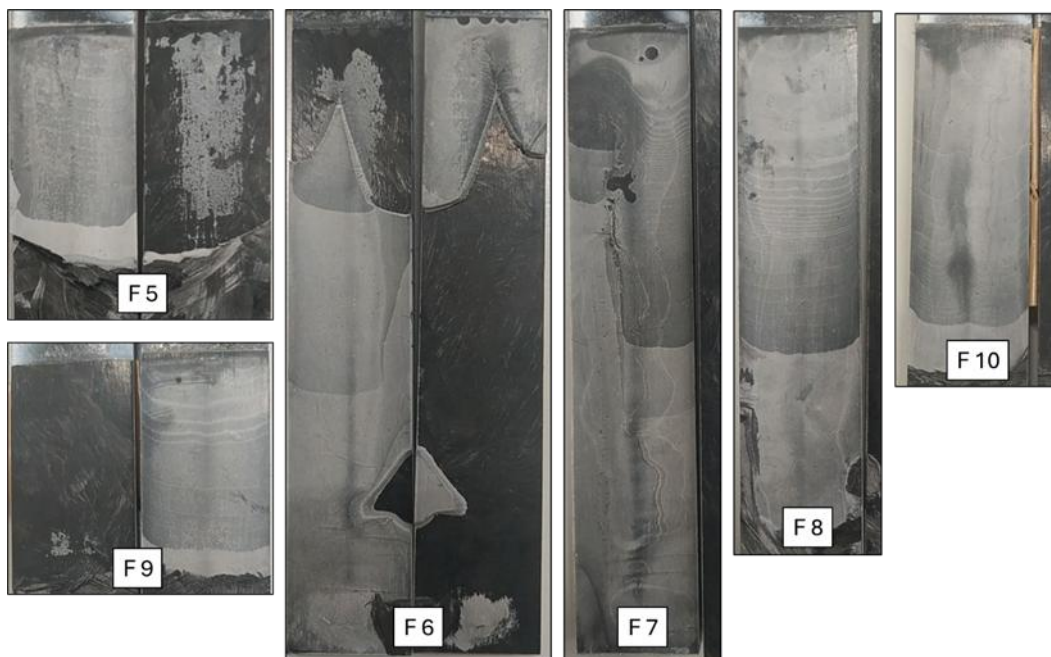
Fracture surfaces for DCB fatigue testing showing the crack front waves on adhesive surface
